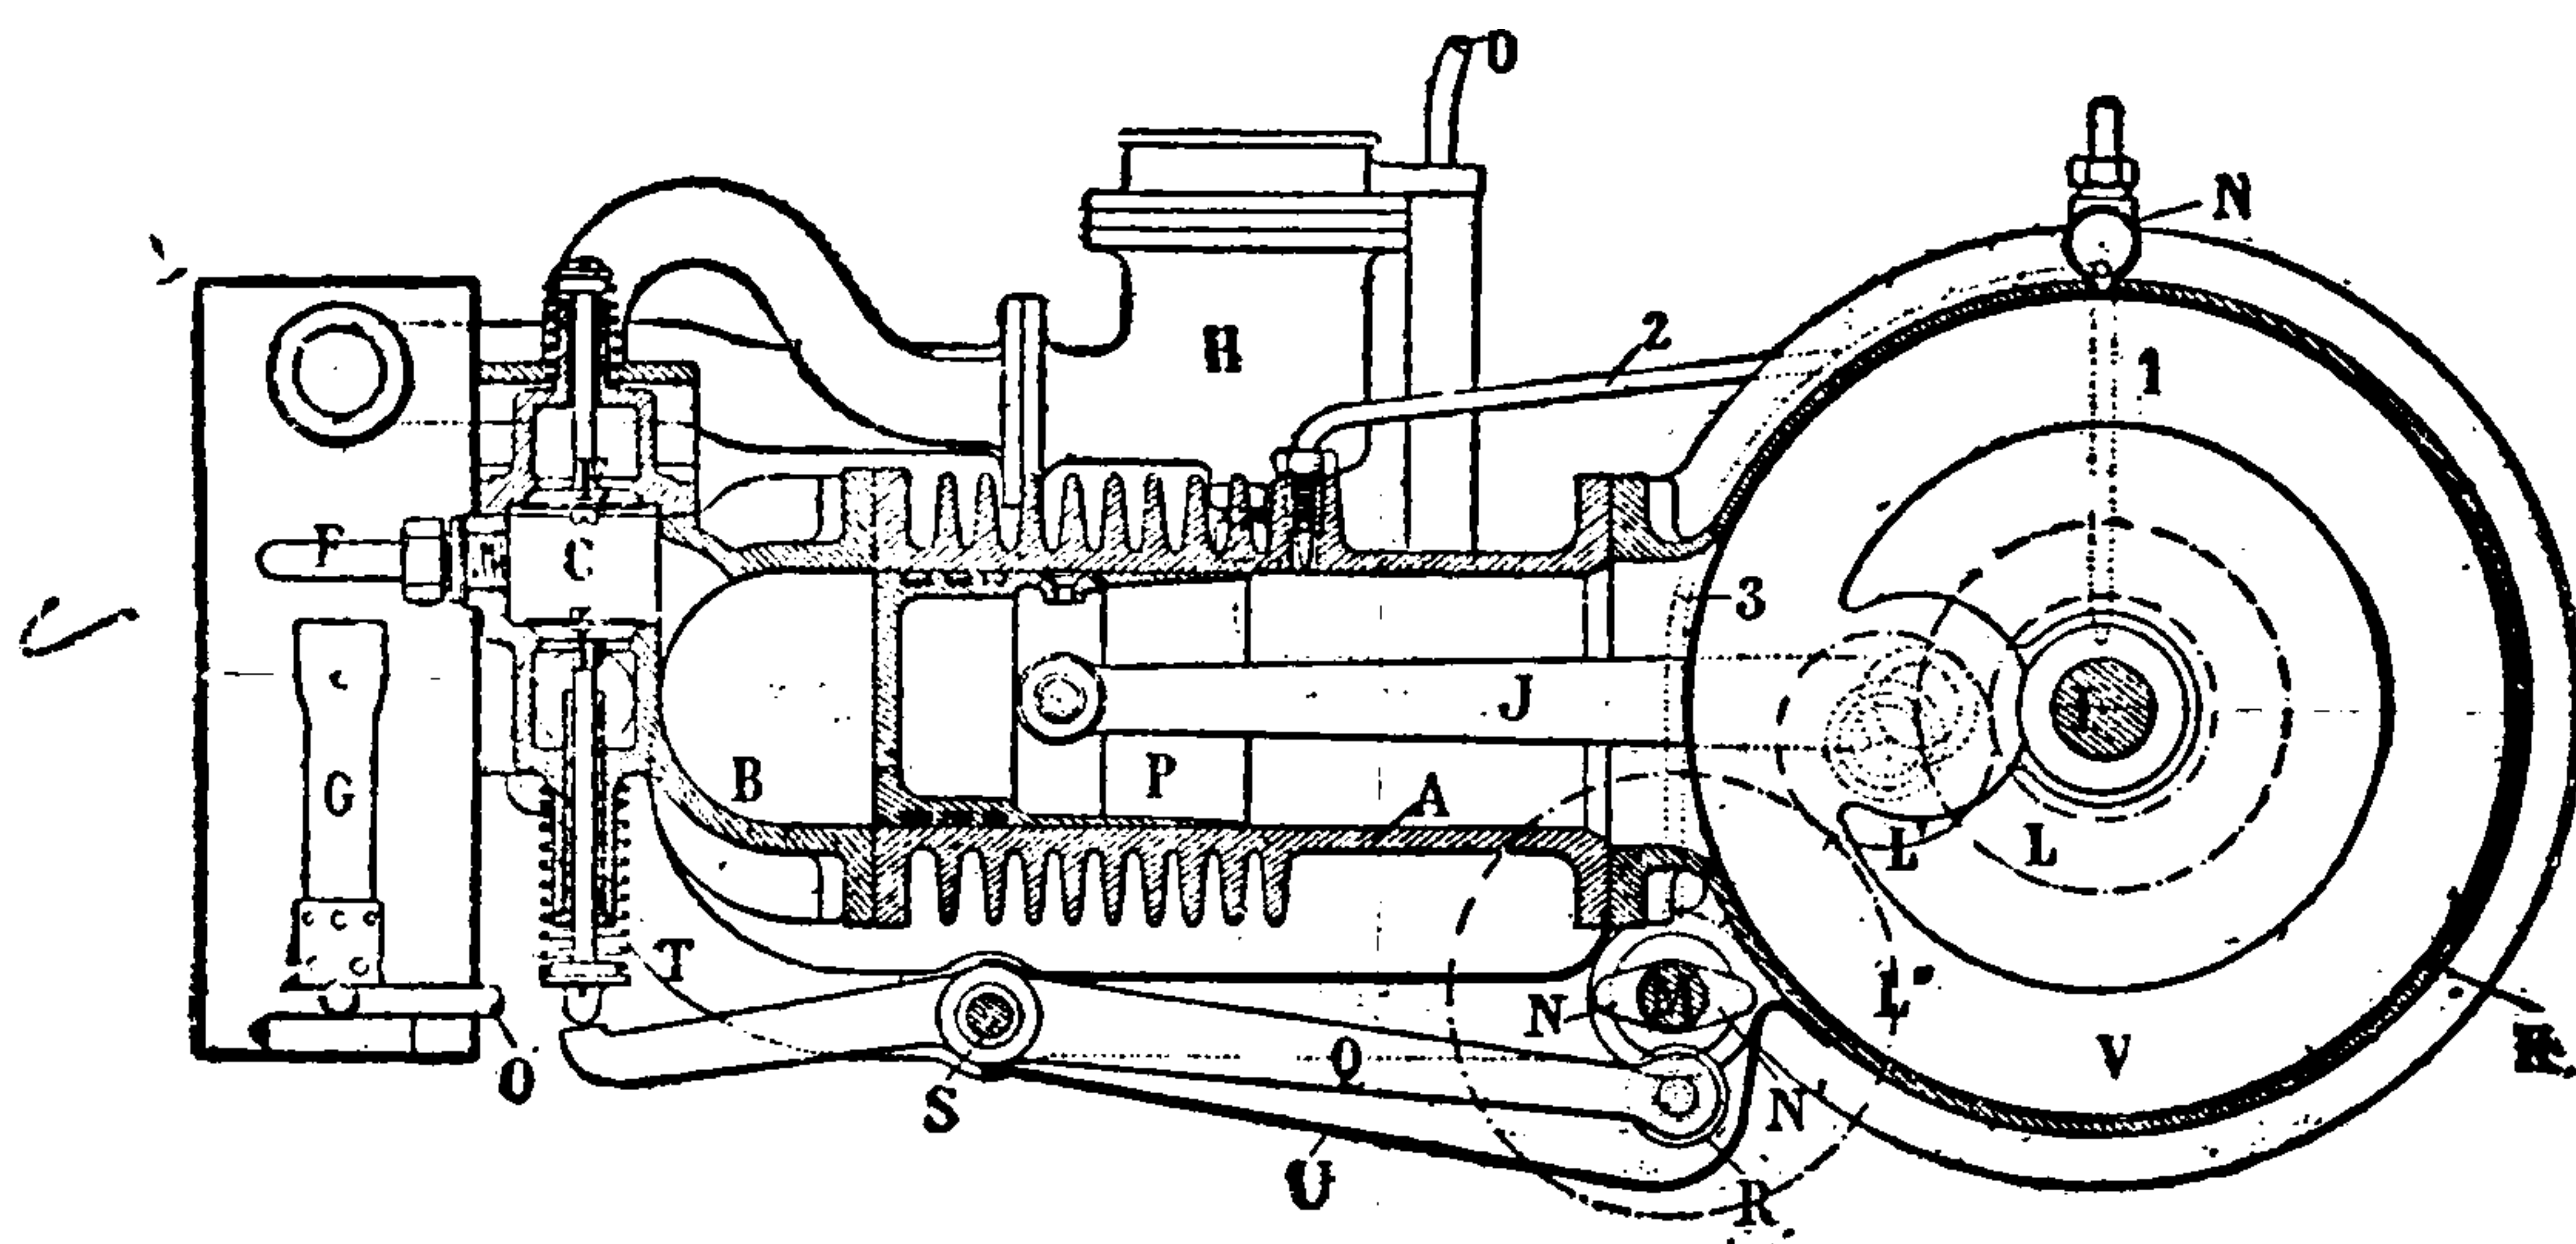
ID.—GASOLINE AUTOMOBILE MOTOR.
